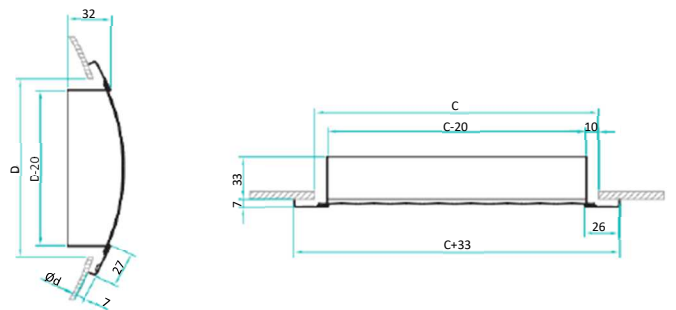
Dimensions of an STR-STS grille for installation with a damper
